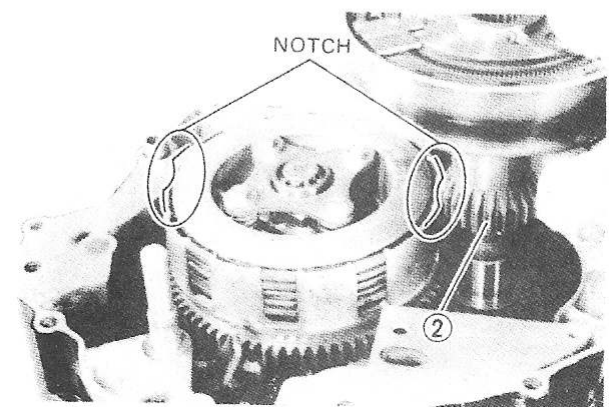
B.25 The secondary clutch housing has notches that allow the primary gear to clear it (Sec 13)
